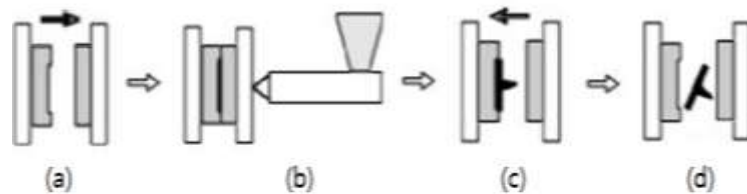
Injection Molding Process: (a) Tool-Close, (b) Injection, (c) Tool-open, (d) Take-out
